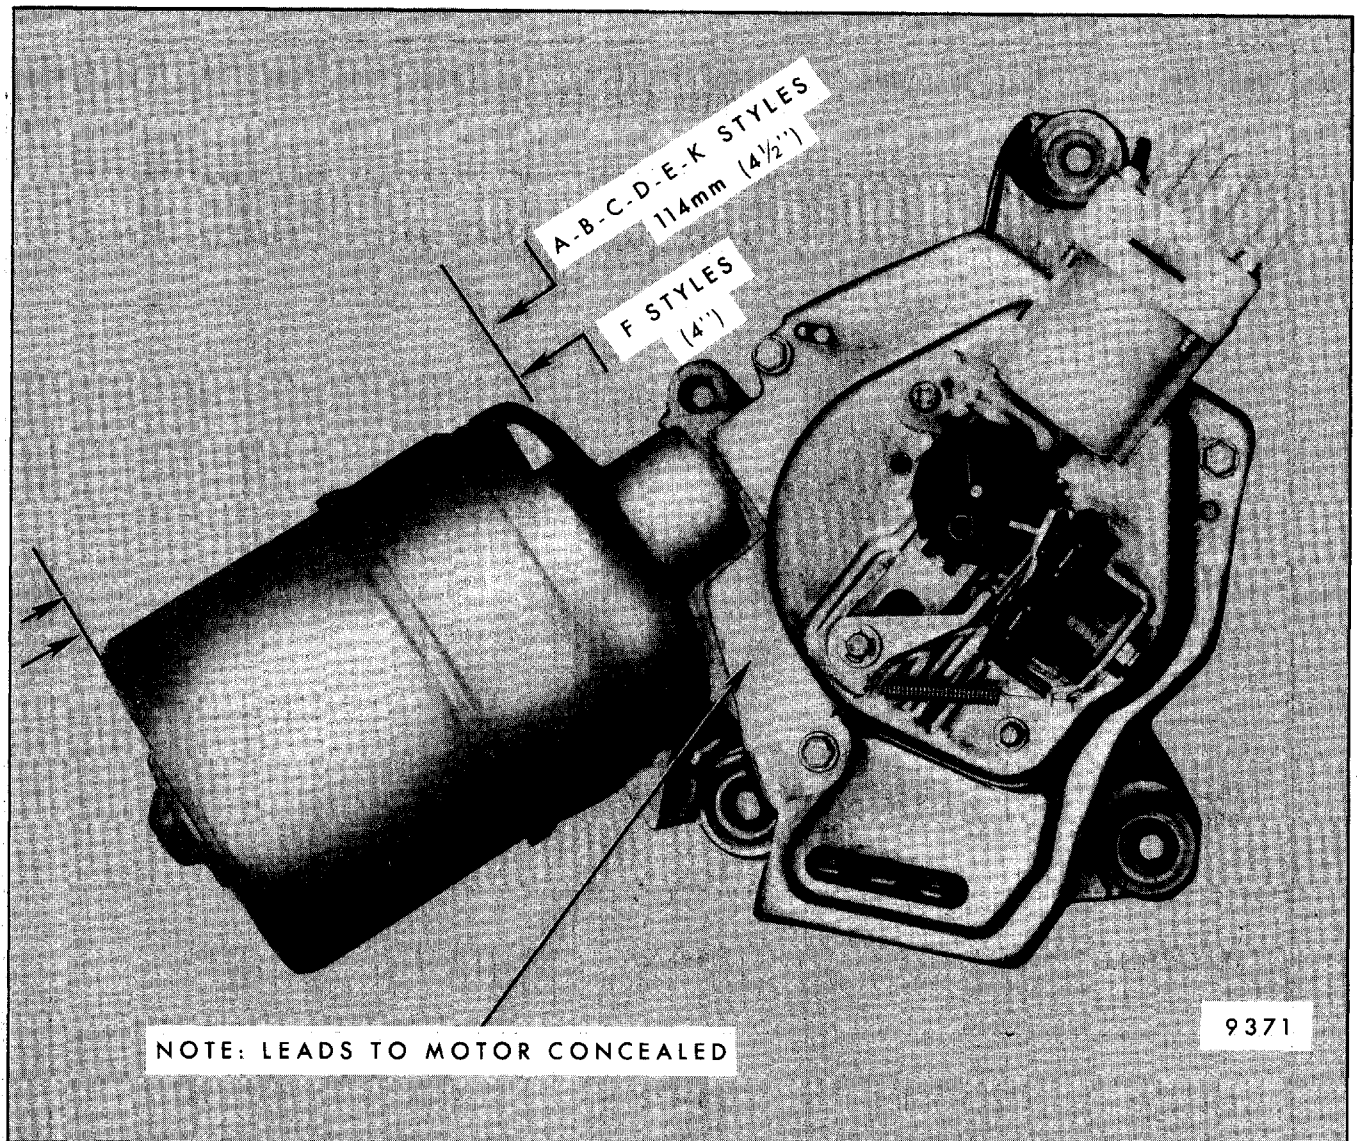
Round Wiper Motor and Pump Assembly (Internal Leads)
